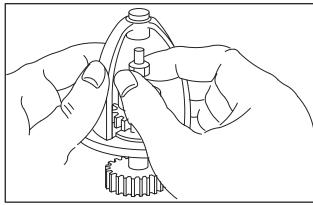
ASSEMBLING STARTER MOTOR DRIVE
